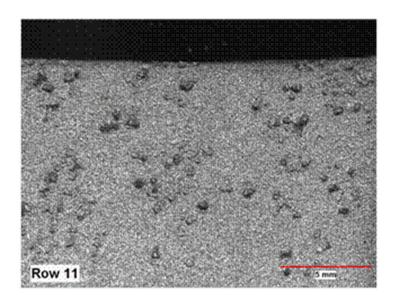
Corrosion/Pitting on a Compressor Blade
